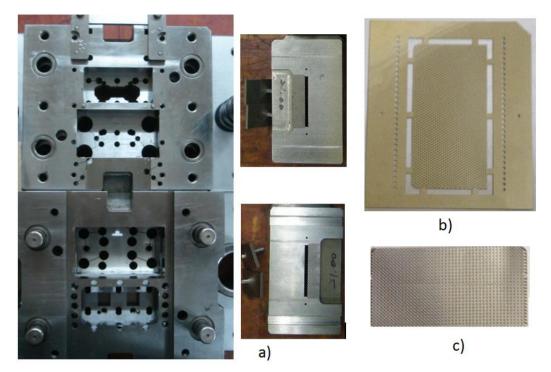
Experiment for actual product a) tools for stamping, b) blank shape and c) final product after forming and trimming.
